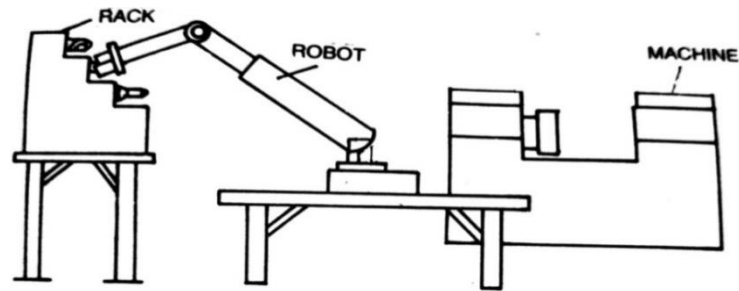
(b) shows the robot used to place the finished part in a rack after completing the Machining operation.
